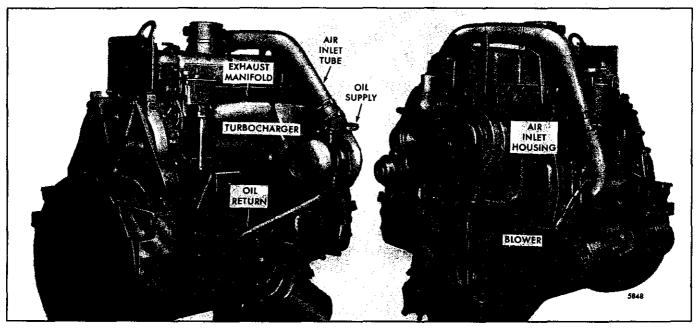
TO4B Turbocharger Mounting (In-Line Engine)
